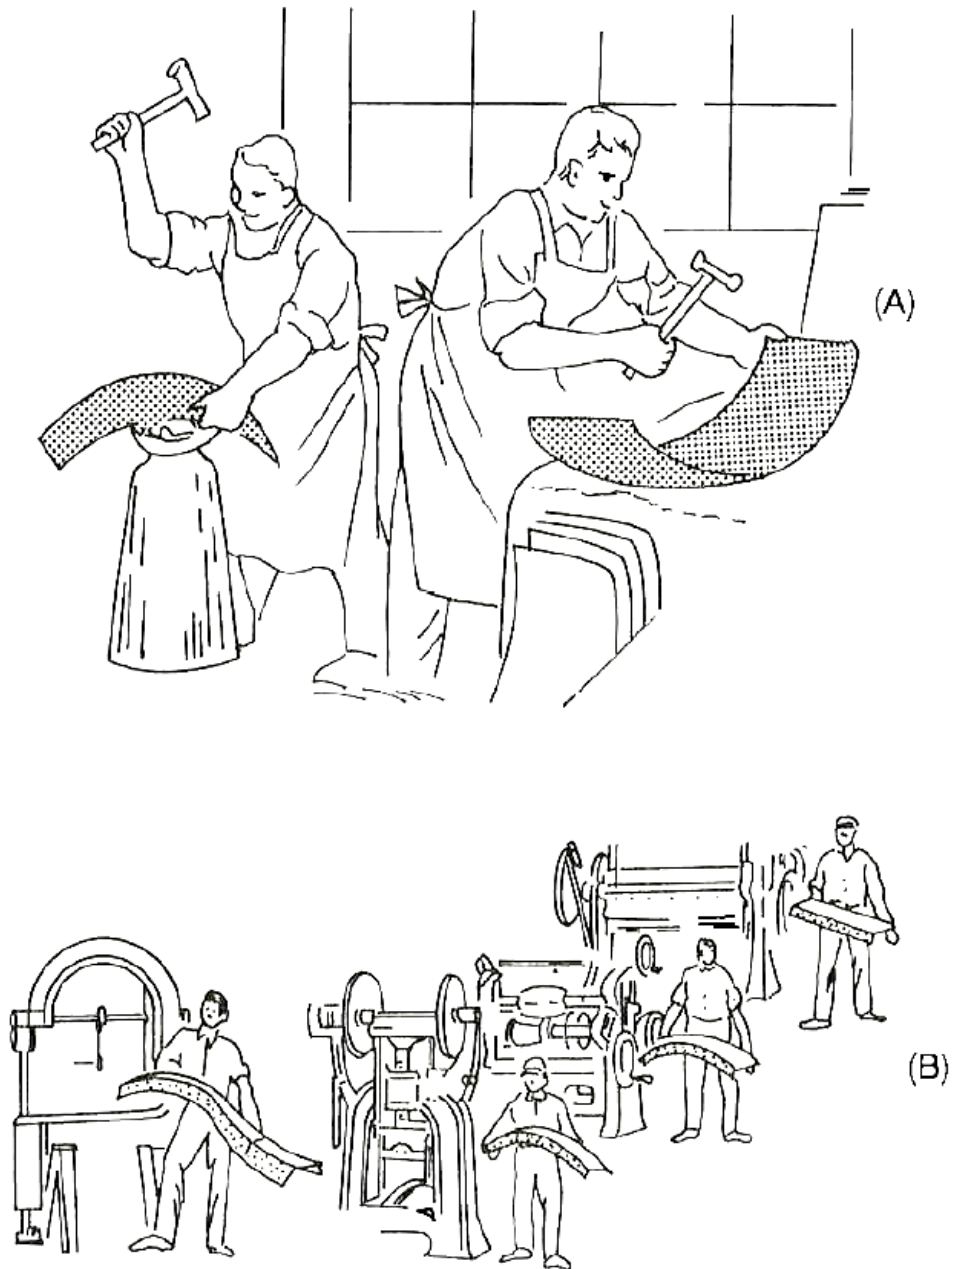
Old style methods of sheet metal forming by hand hammering and combination of small size working machines ²⁵⁾.
